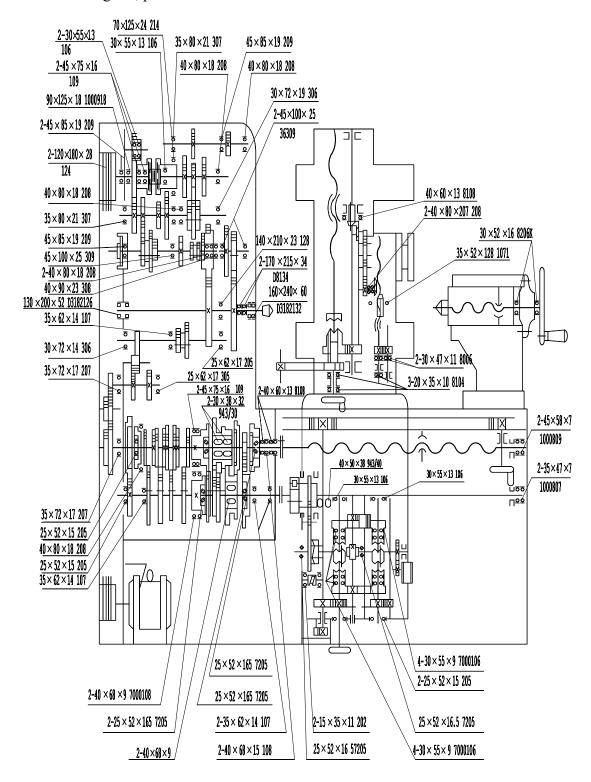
Arrangement of rolling bearings for CW80B, CW110B and CW100Q
